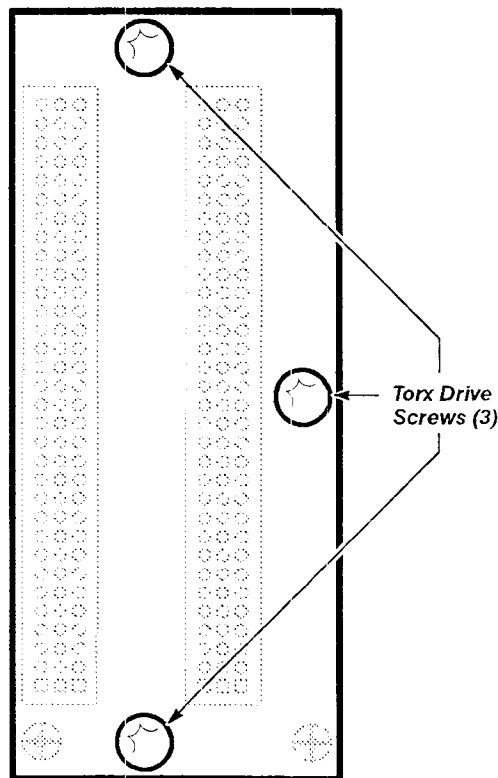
Removing/Replacing the A21 Mini Mother Board
